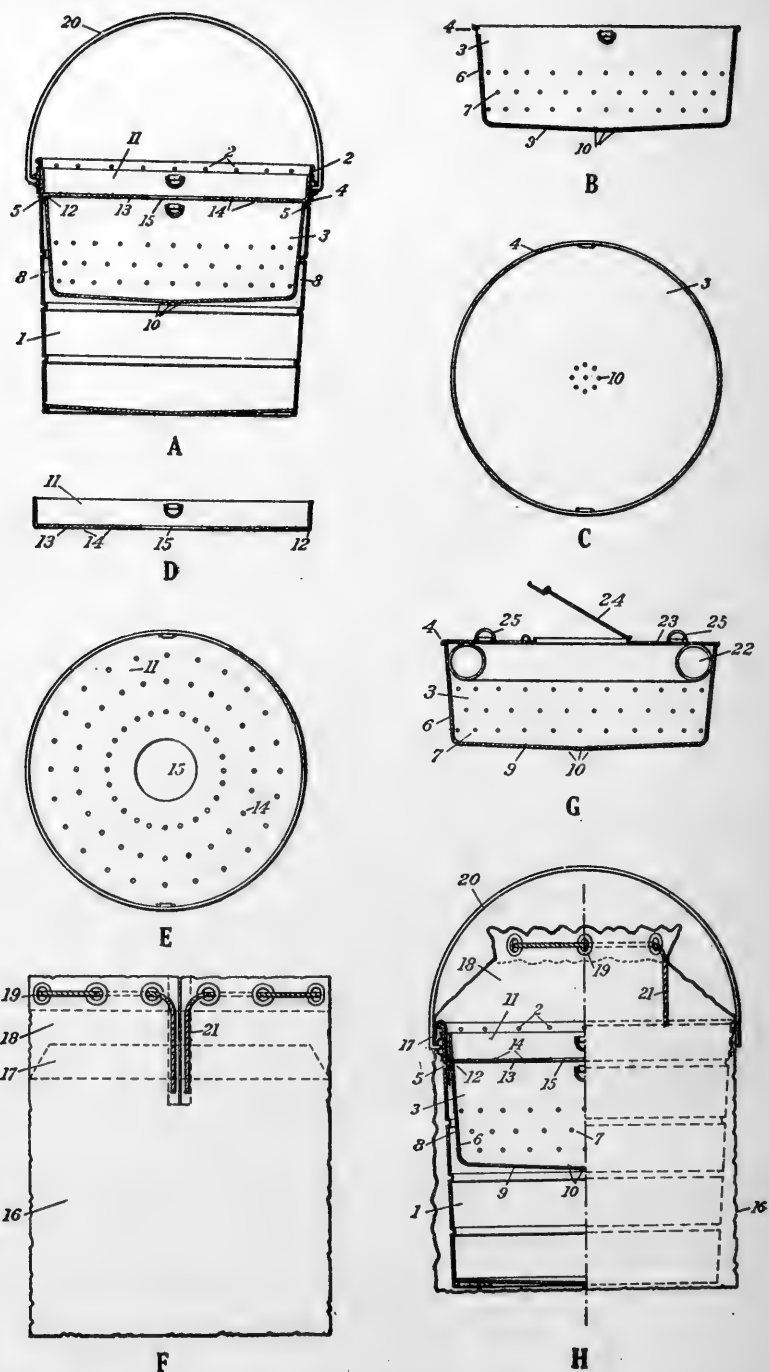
The Fearnow self-aerating fish transportation pail with canvas jacket. A, Vertical section of container; B, vertical section of lower tray; C, plan view of lower tray; D, vertical section of top tray; E, plan view of top tray; F, elevation of jacket; G, vertical section of a tray that may replace other trays in case container is used as a minnow or bait pail; H, side elevation, partly in section, of container with absorbent jacket in position.
